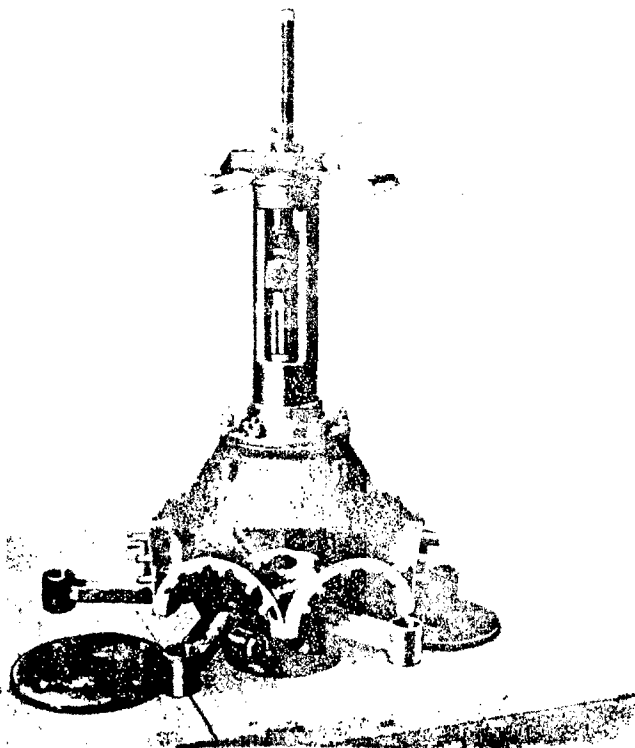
Removing Front Crankcase from Crankshaft Assembly
